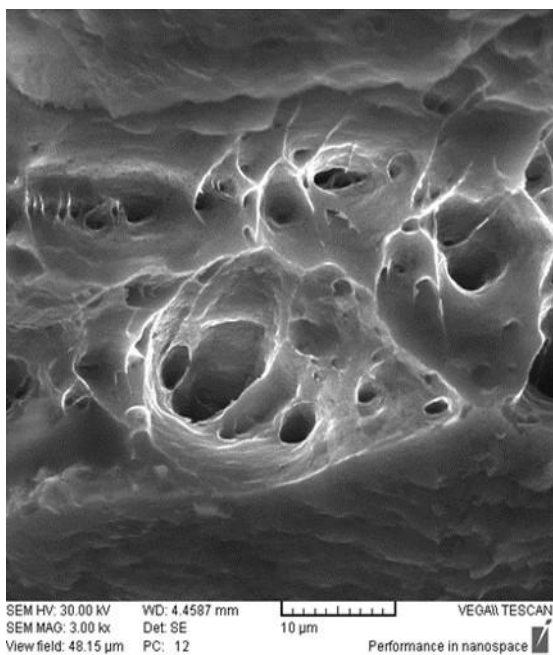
Tensile fracture surfaces of initial sample Al 1050
